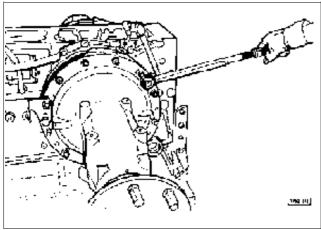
Having located the bolts, tighten with a torque wrench to 8,5 kgm for Silver 80 - 90 - 100.4 machines and 17 kgm for a Silver 100.6.
